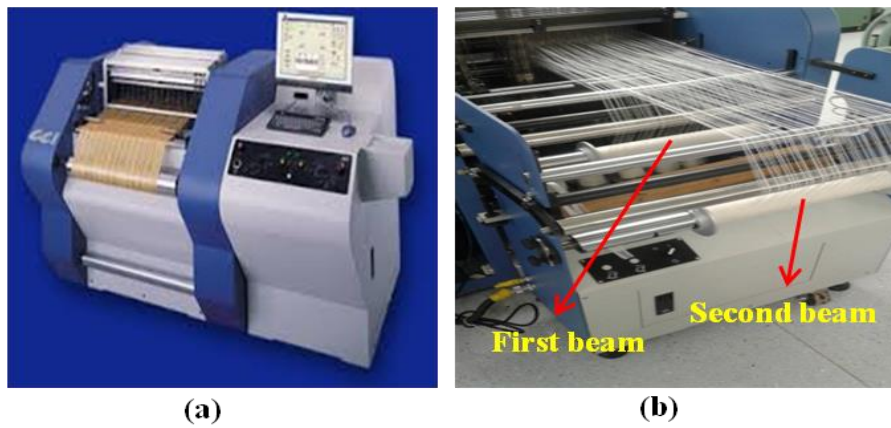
Weaving machine: (a) CCI Rapier weaving machine; (b) second beam assembly
